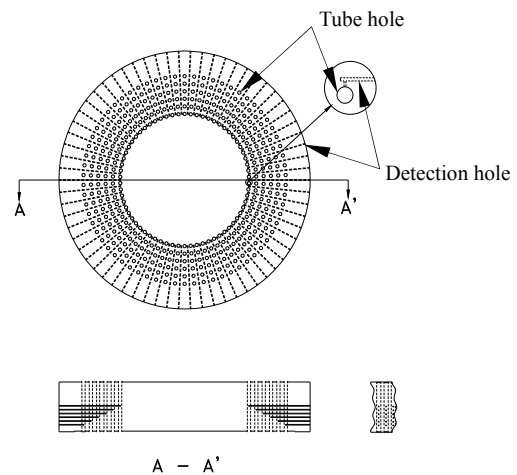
Arrangement of the tube holes and the detection holes in the lower tube sheet
